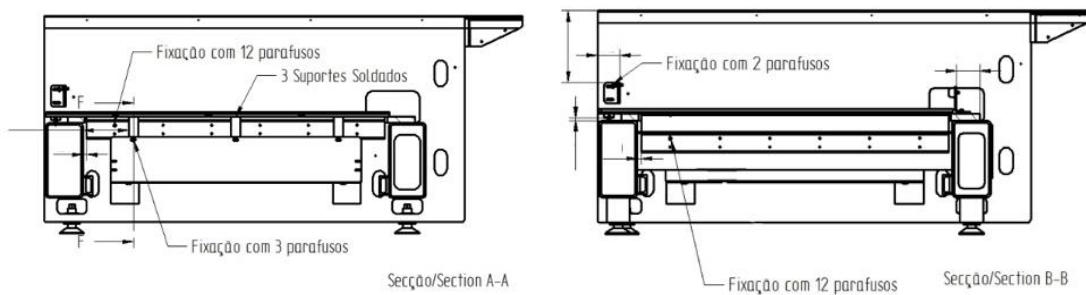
Cut views of the machine platform, with the installation of both supports.
